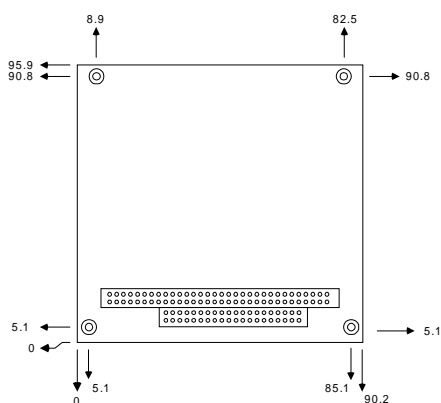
PC/104 module dimensions (mm) (± 0.1)
